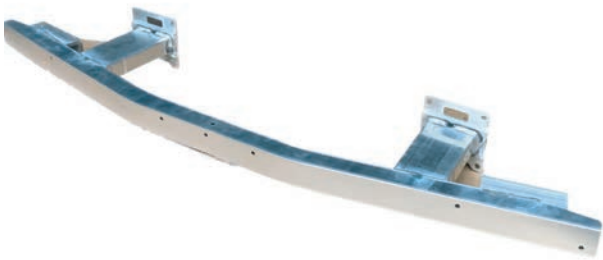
Lightweight aluminum front bumper assembly (Mass production by UWH).
